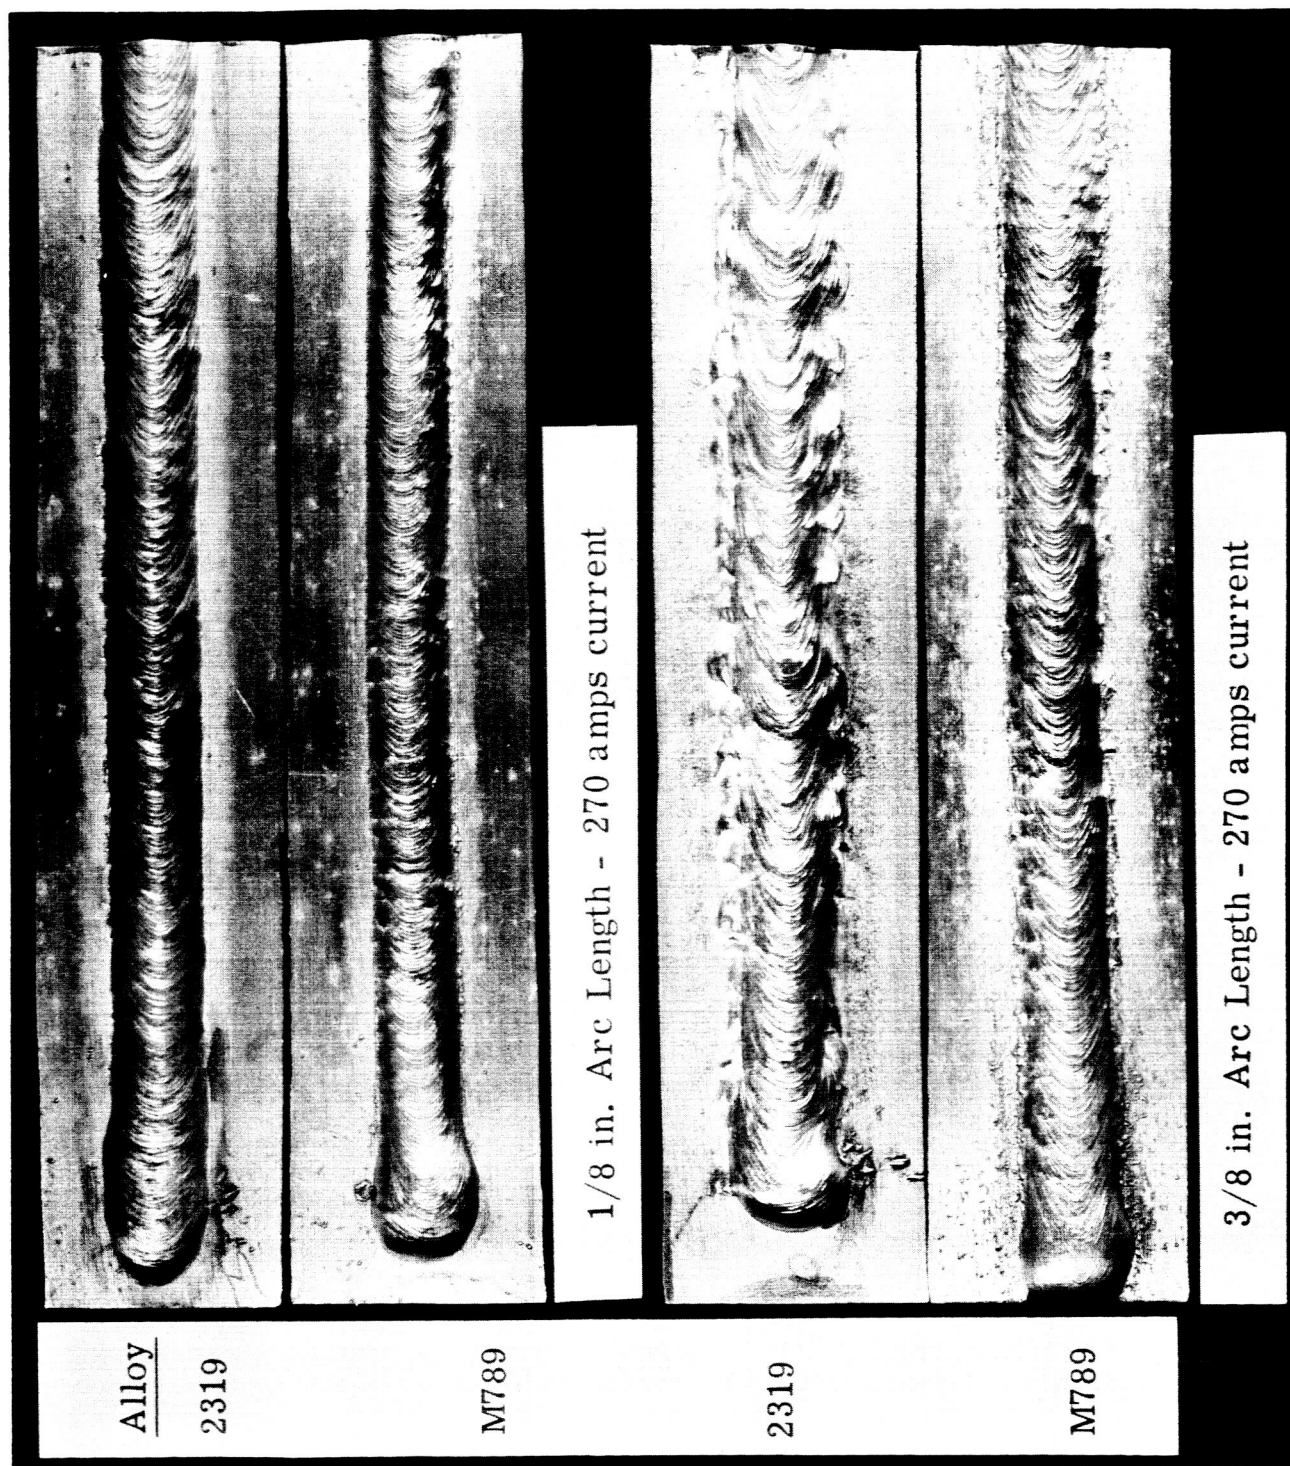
Photograph of weld beads deposited by 2319 and M789 (2319 + 1.0 Zn) fillers in flat position
